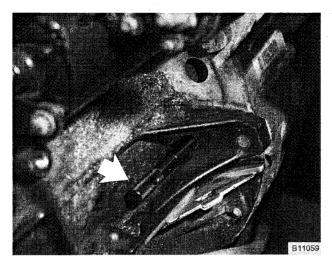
BMW special tool 11 2 300 (arrow) inserted through bellhousing hole and into flywheel.
